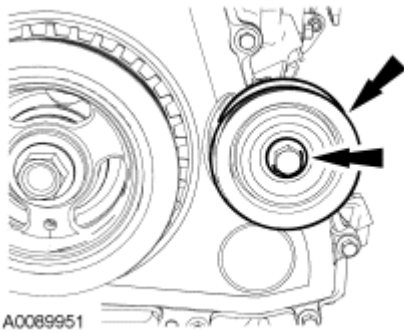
Locating Accessory Drive Belt Idler Pulley And Bolt
